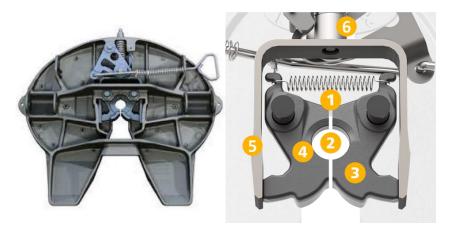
Fifth wheel coupler Holland TwinLock mechanism
